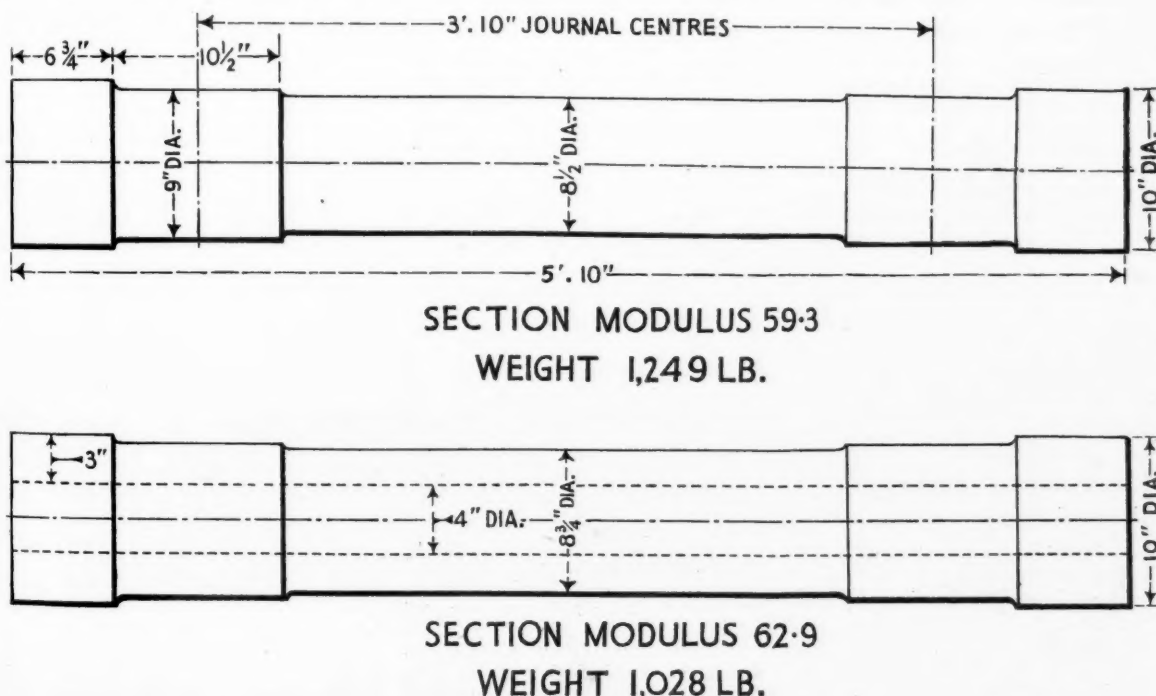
Solid and redesigned axle for intermediate, and trailing coupled wheels of a four-cylinder, 4-6-0 type express locomotive for the 4 ft. 8 1/2 in. gauge
